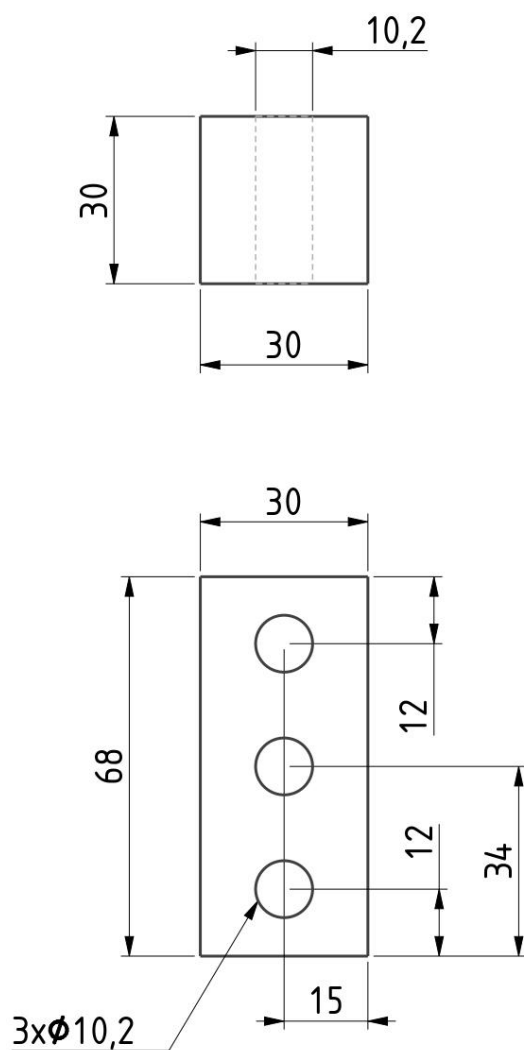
2D technical drawing of the *Fix 4* part of the fix clamp assembly (mm).
